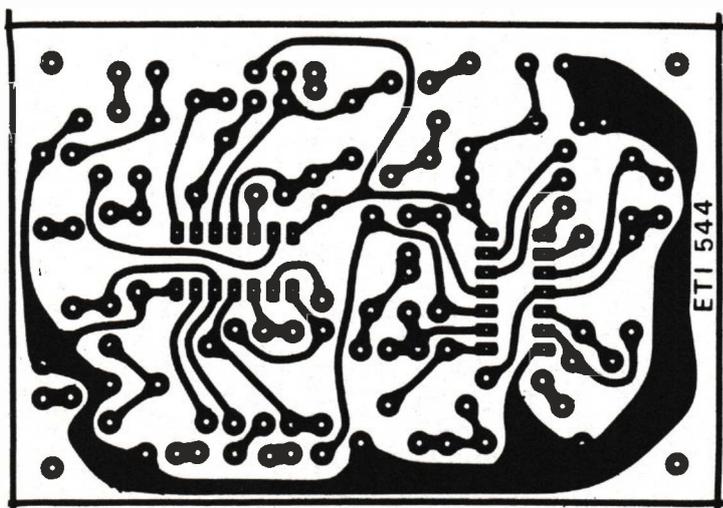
Printed circuit layout. Full size 91 x 64mm.
